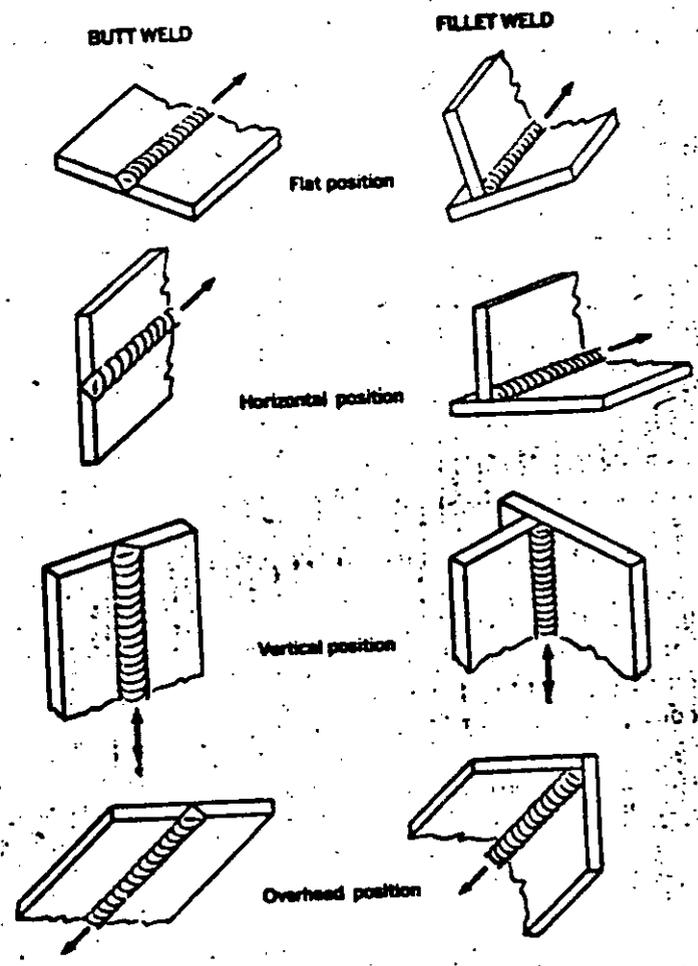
Positions of welding for fillet and butt welds. (Courtesy of American Welding Society.)
